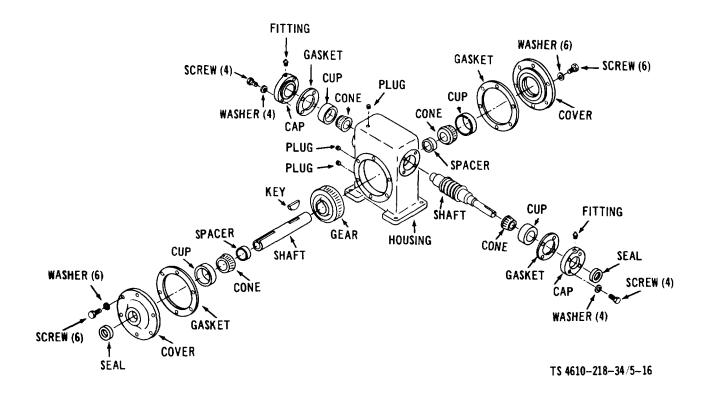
Slurry Feeder Speed Reducer, Disassembly and Reassembly
